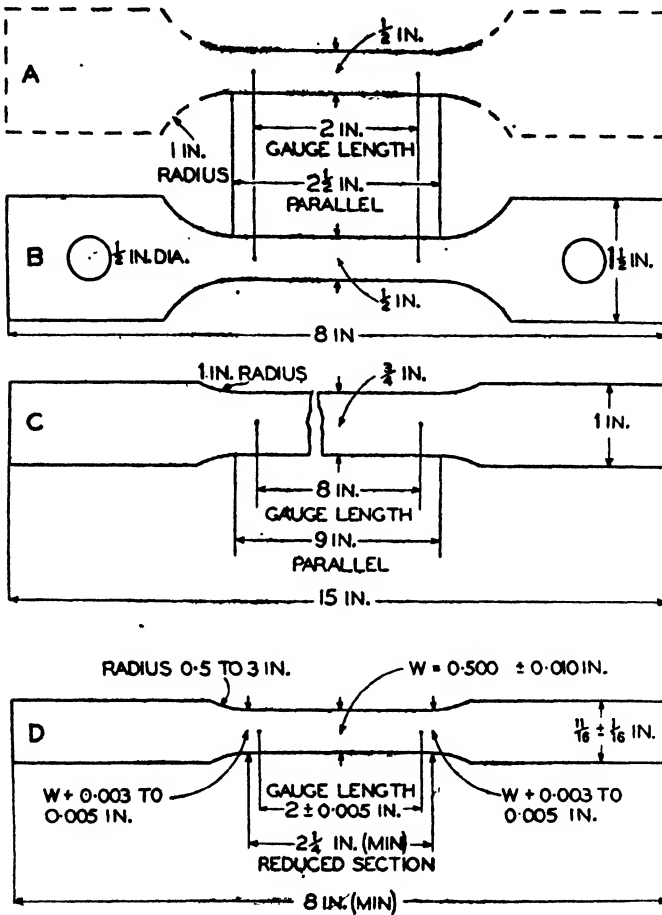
Standard forms of tensile test piece for thin sheet metal.
